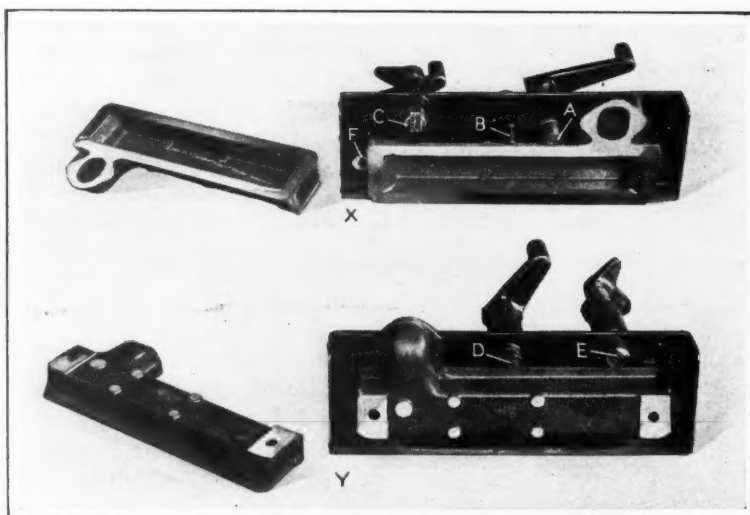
Two Fixtures Employed in Grinding Both Sides of a Radiator Frame Casting
